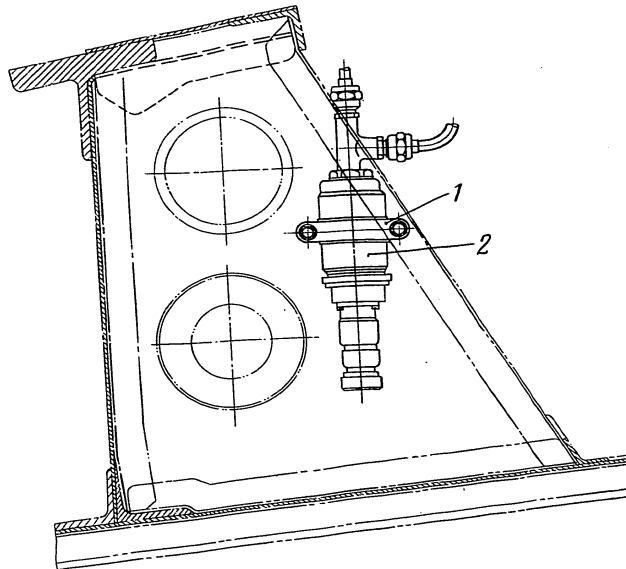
INSTALLATION OF ELECTRICALLY OPERATED PNEUMATIC VALVE CONTROLLING
